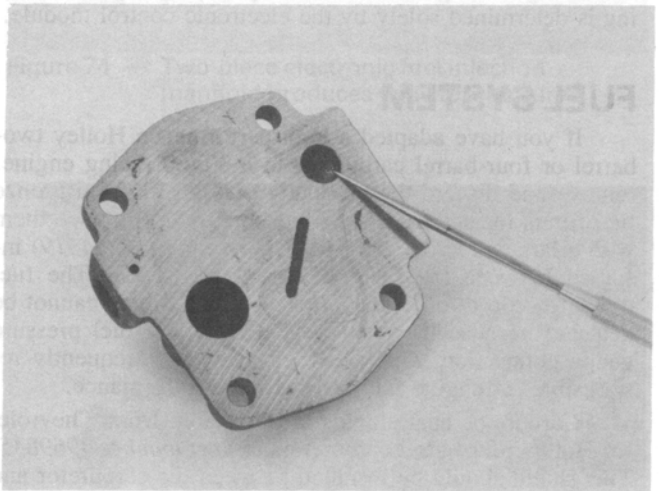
Drill out oil pump pressure bypass passage to .410-inch diameter.
